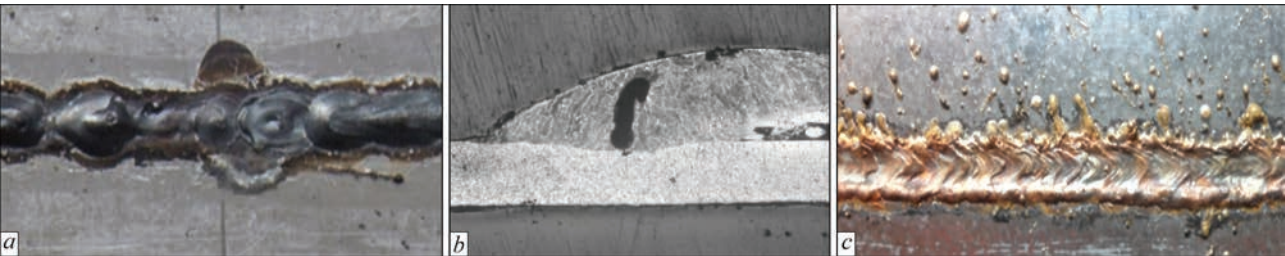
Appearance (a), and macrostructure (b) of the weld produced by MIG-welding and MIG-brazing (c) of galvanized steel
